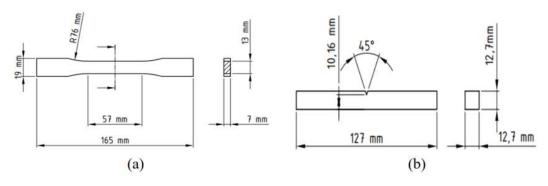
Shape and size of specimen (a) Tensile test, (b) Impact test
